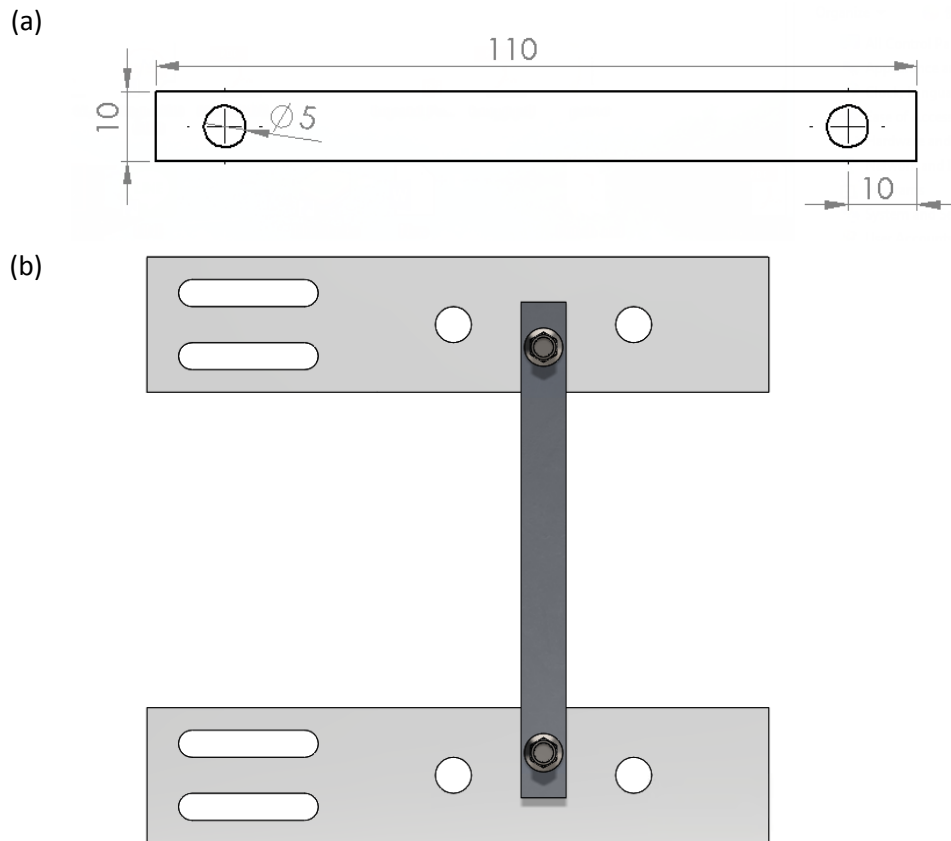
Improved version of: (a) workpiece; (b) workpiece with workpiece holders.
